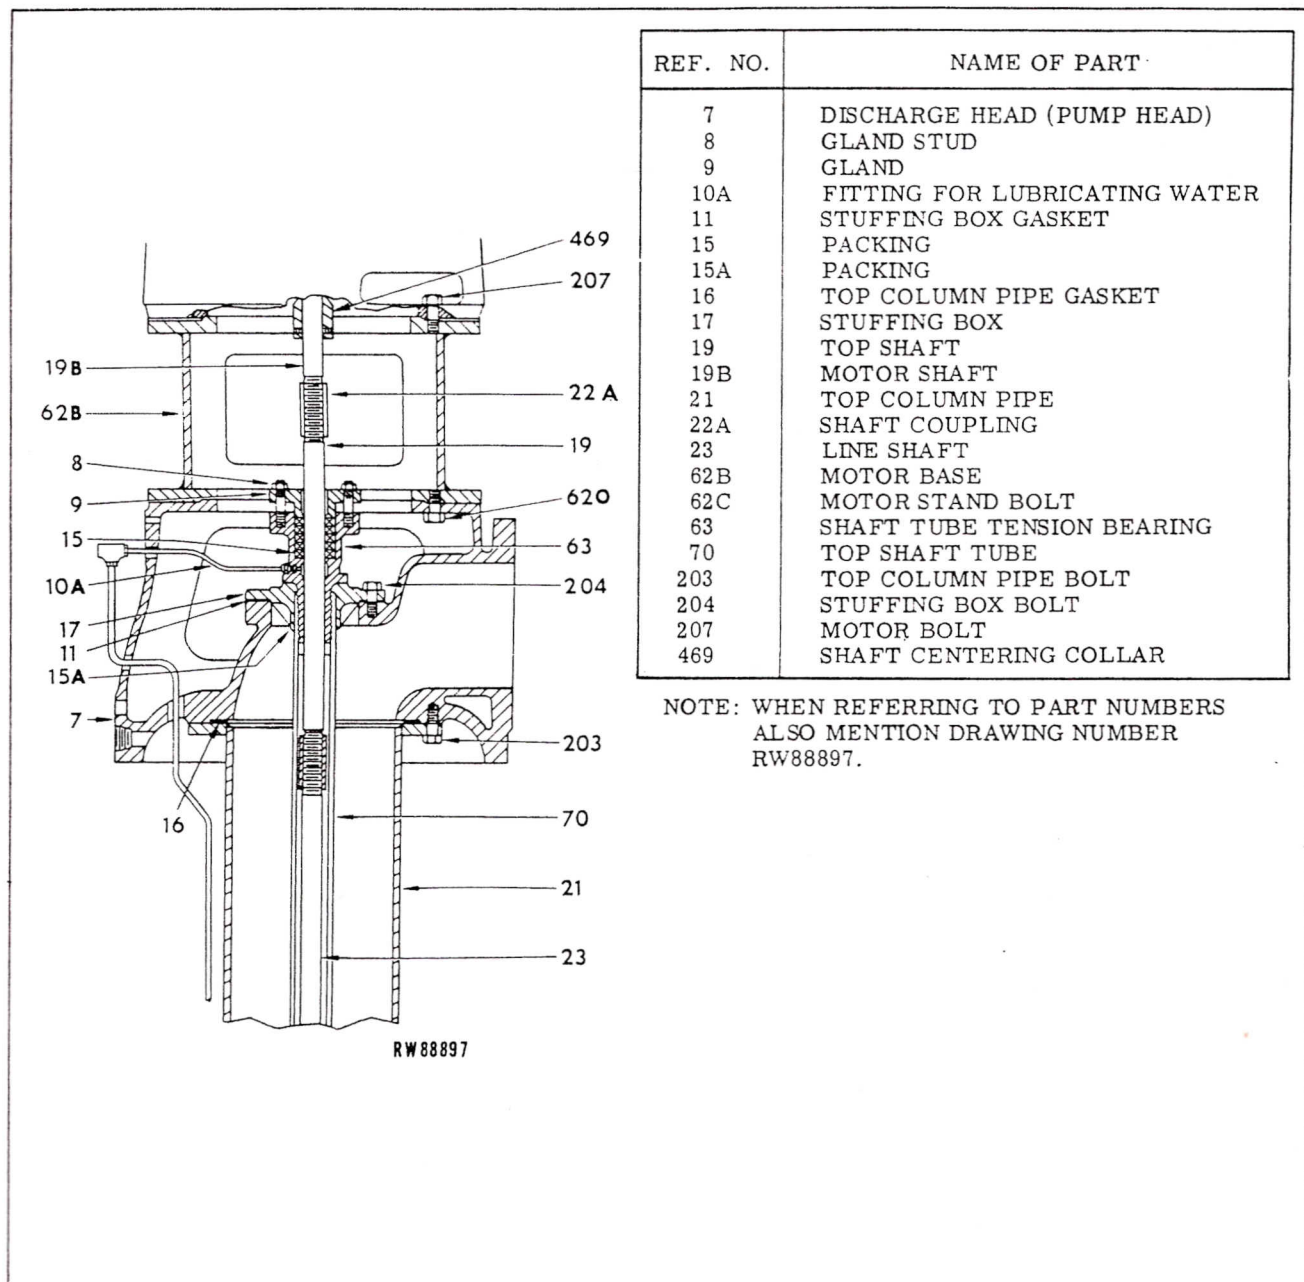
Enclosed Lineshaft Water Lubricated Pump and List of Parts
